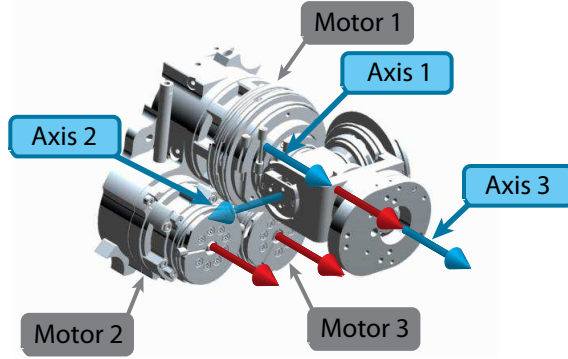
The iCub shoulder. A CAD view of the shoulder joint mechanism showing the three motors actuating the 3 degrees of freedom universal joint.
